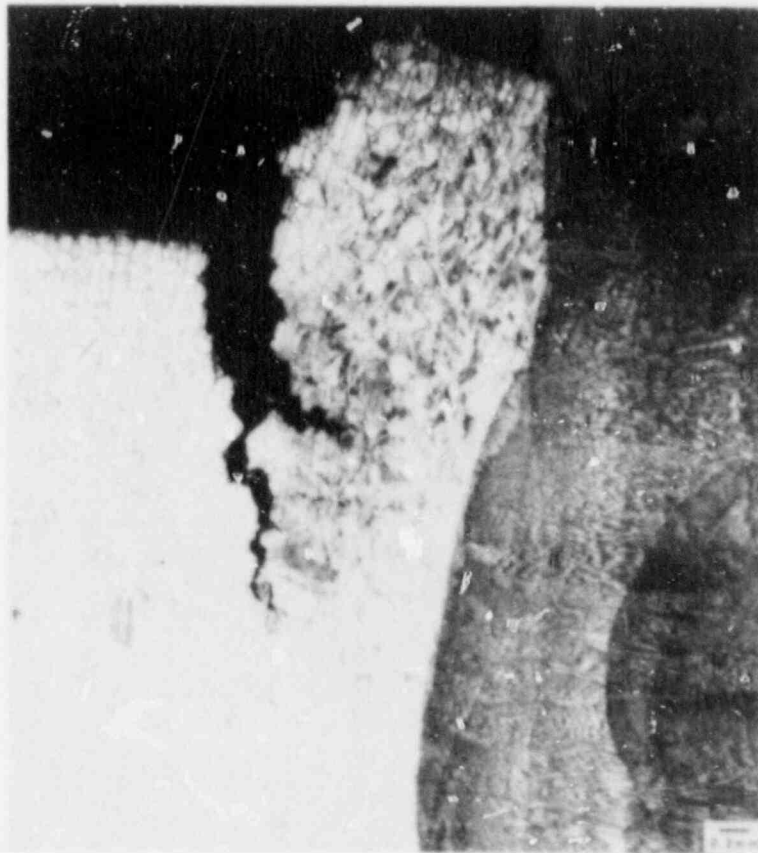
Cross Section of a 1TCT Weld Overlay Specimen Showing Crack Branching and Propagation in the Base Material near the Weld Fusion Line.
